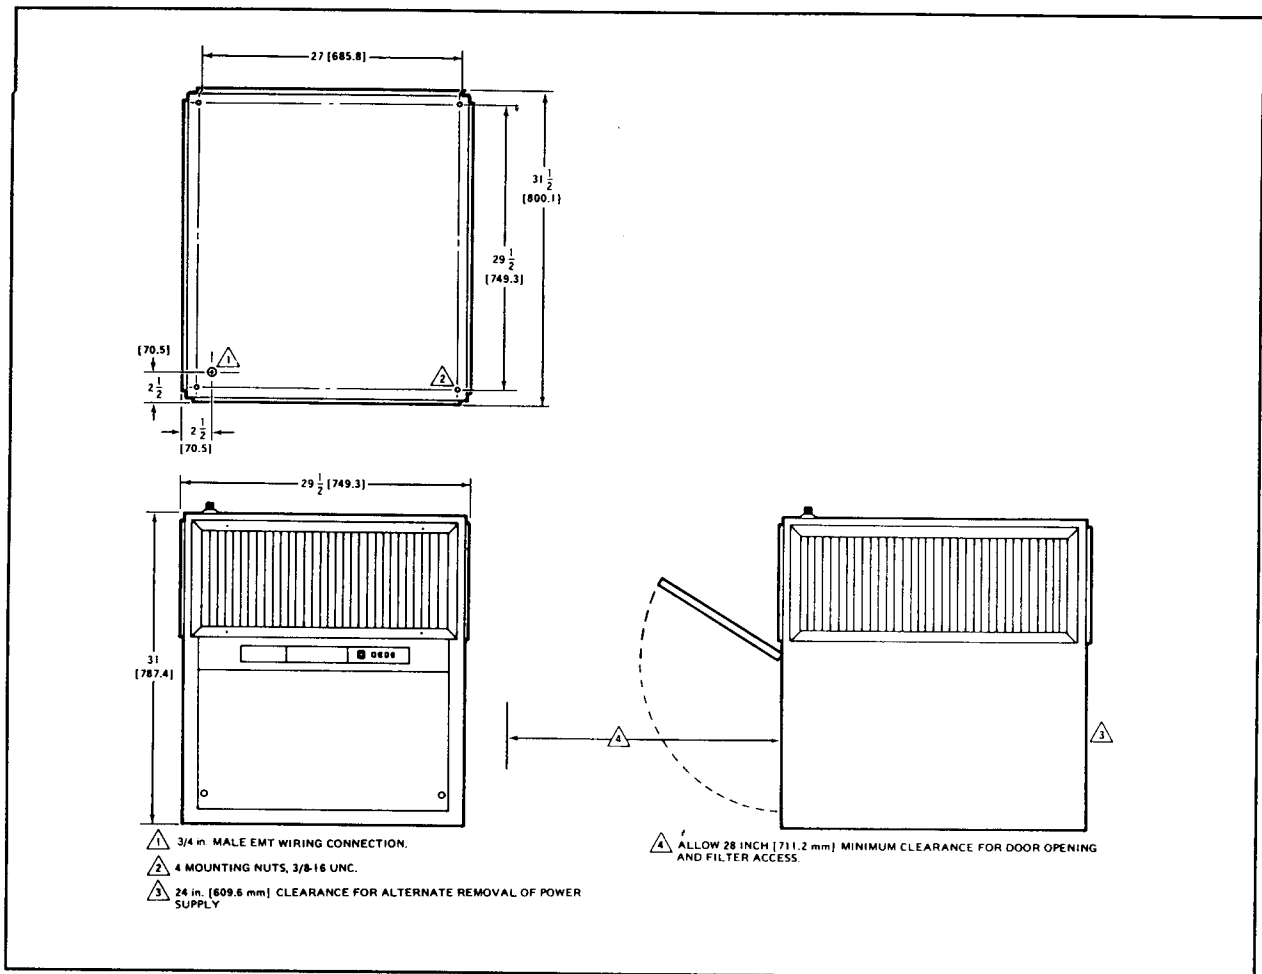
F62B DIMENSIONS IN INCHES (mm SHOWN IN BRACKETS)
